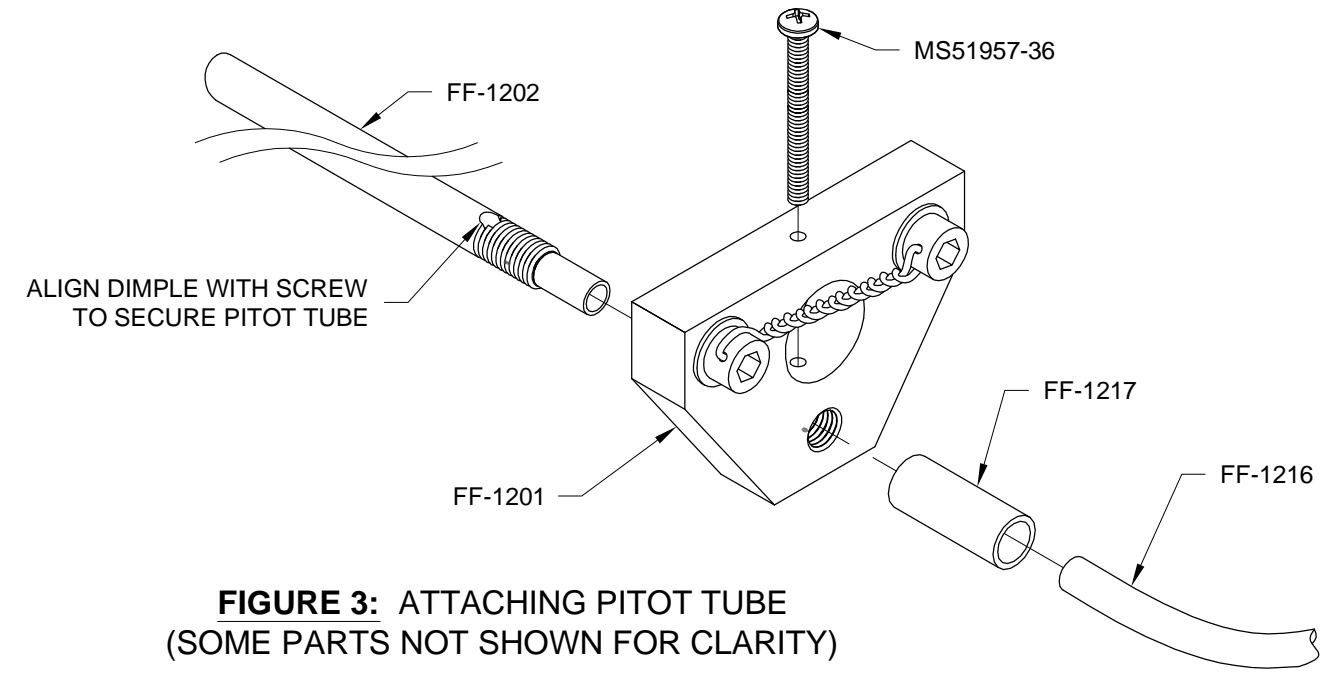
ATTACHING PITOT TUBE (SOME PARTS NOT SHOWN FOR CLARITY)
